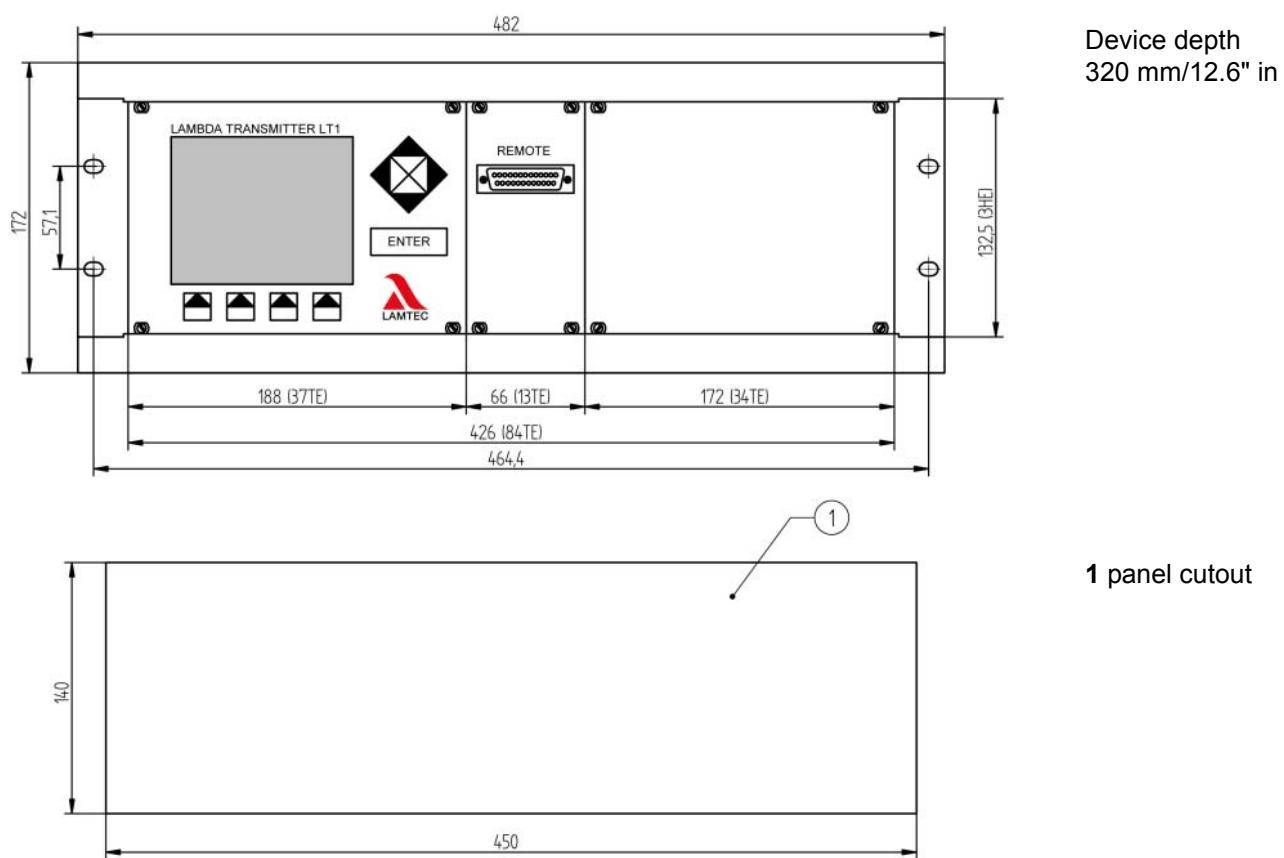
Dimensional drawing LT1 type 657R004 19"-housing with display and operating unit
